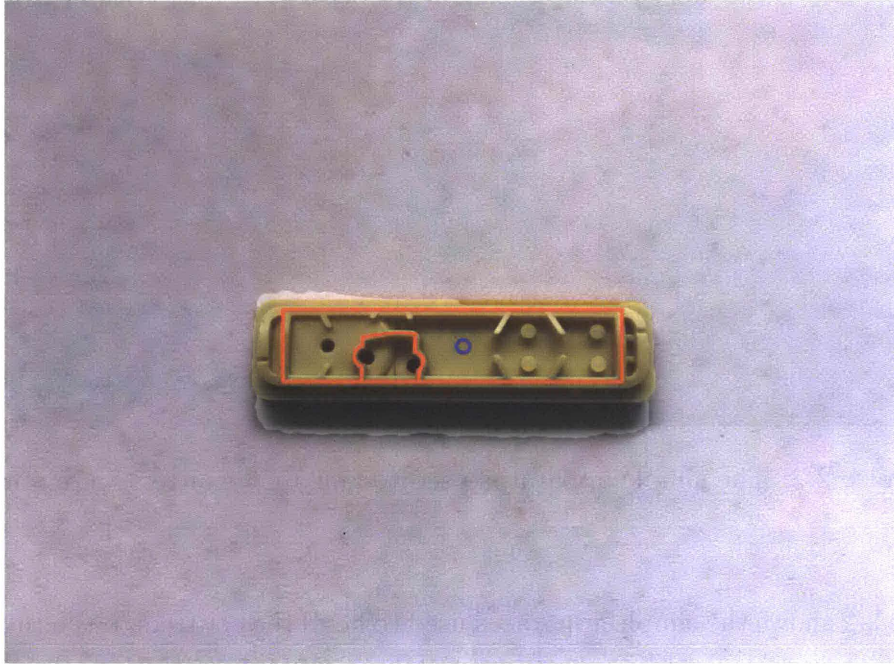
A drip emitter, with necessary seals outlined in red, and drill hole location marked in blue.
